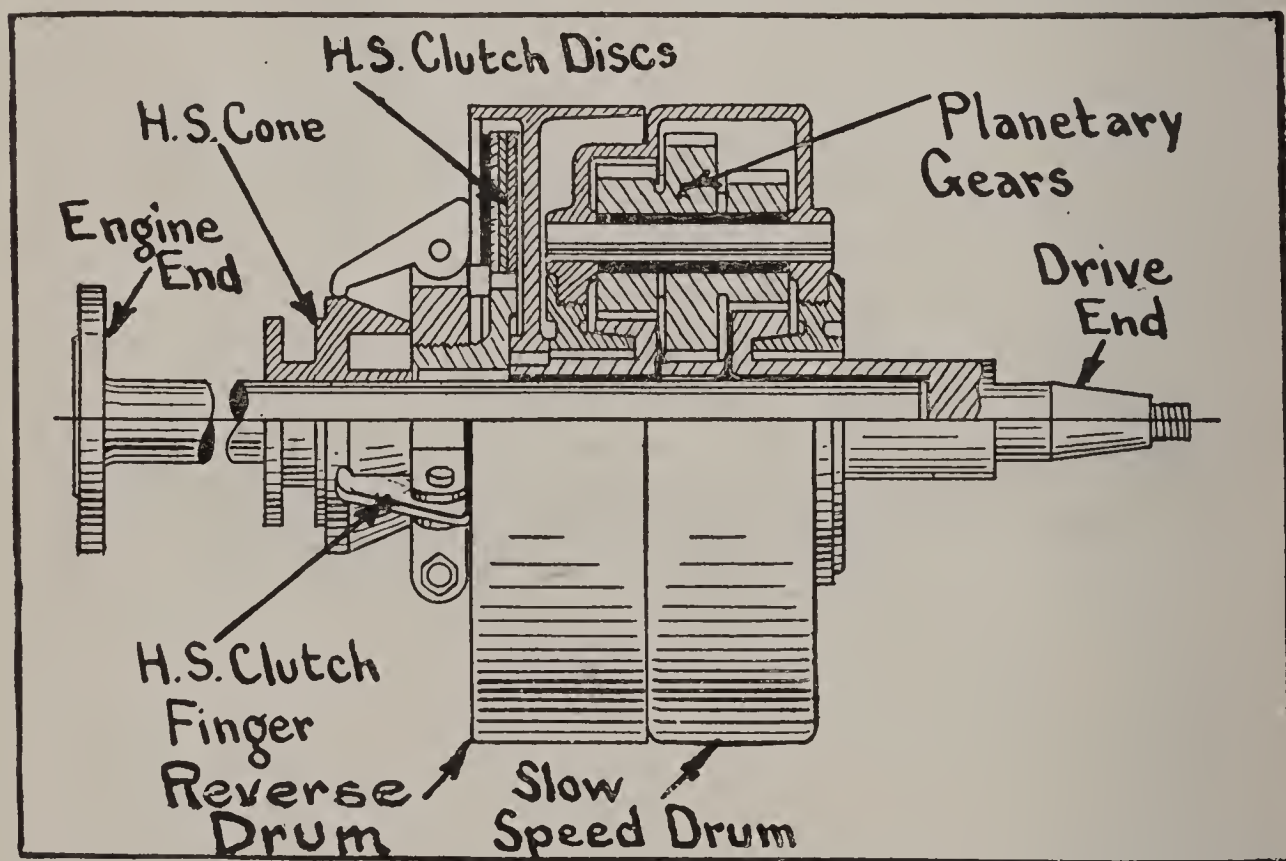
Part Sectional View of Two Speed and Reverse Planetary Gearing for Cyclecars and Light Cars.
